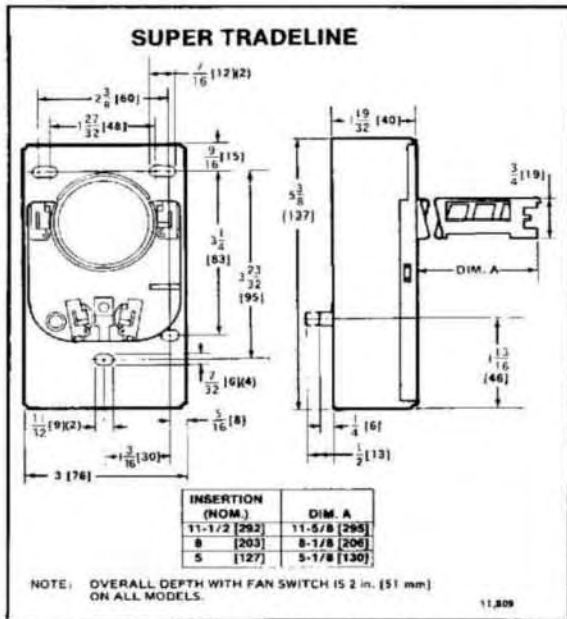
MOUNTING DIMENSIONS IN in. [mm IN BRACKETS] OF SUPER TRADELINE MODEL.
